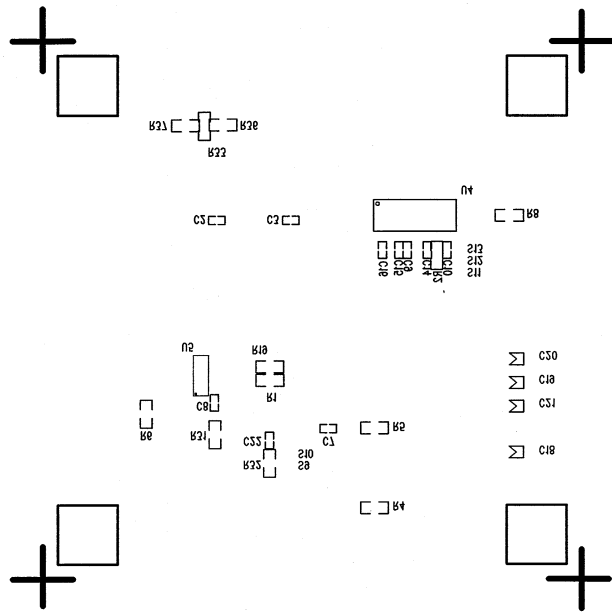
Printed Circuit Board Bottom Side Silkscreen
